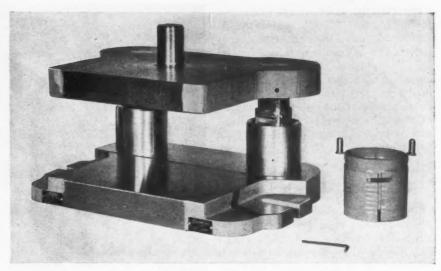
Lempco Anti-friction Die Set with Roller-bearing Guide Pins and Adjustable Metal Guard
